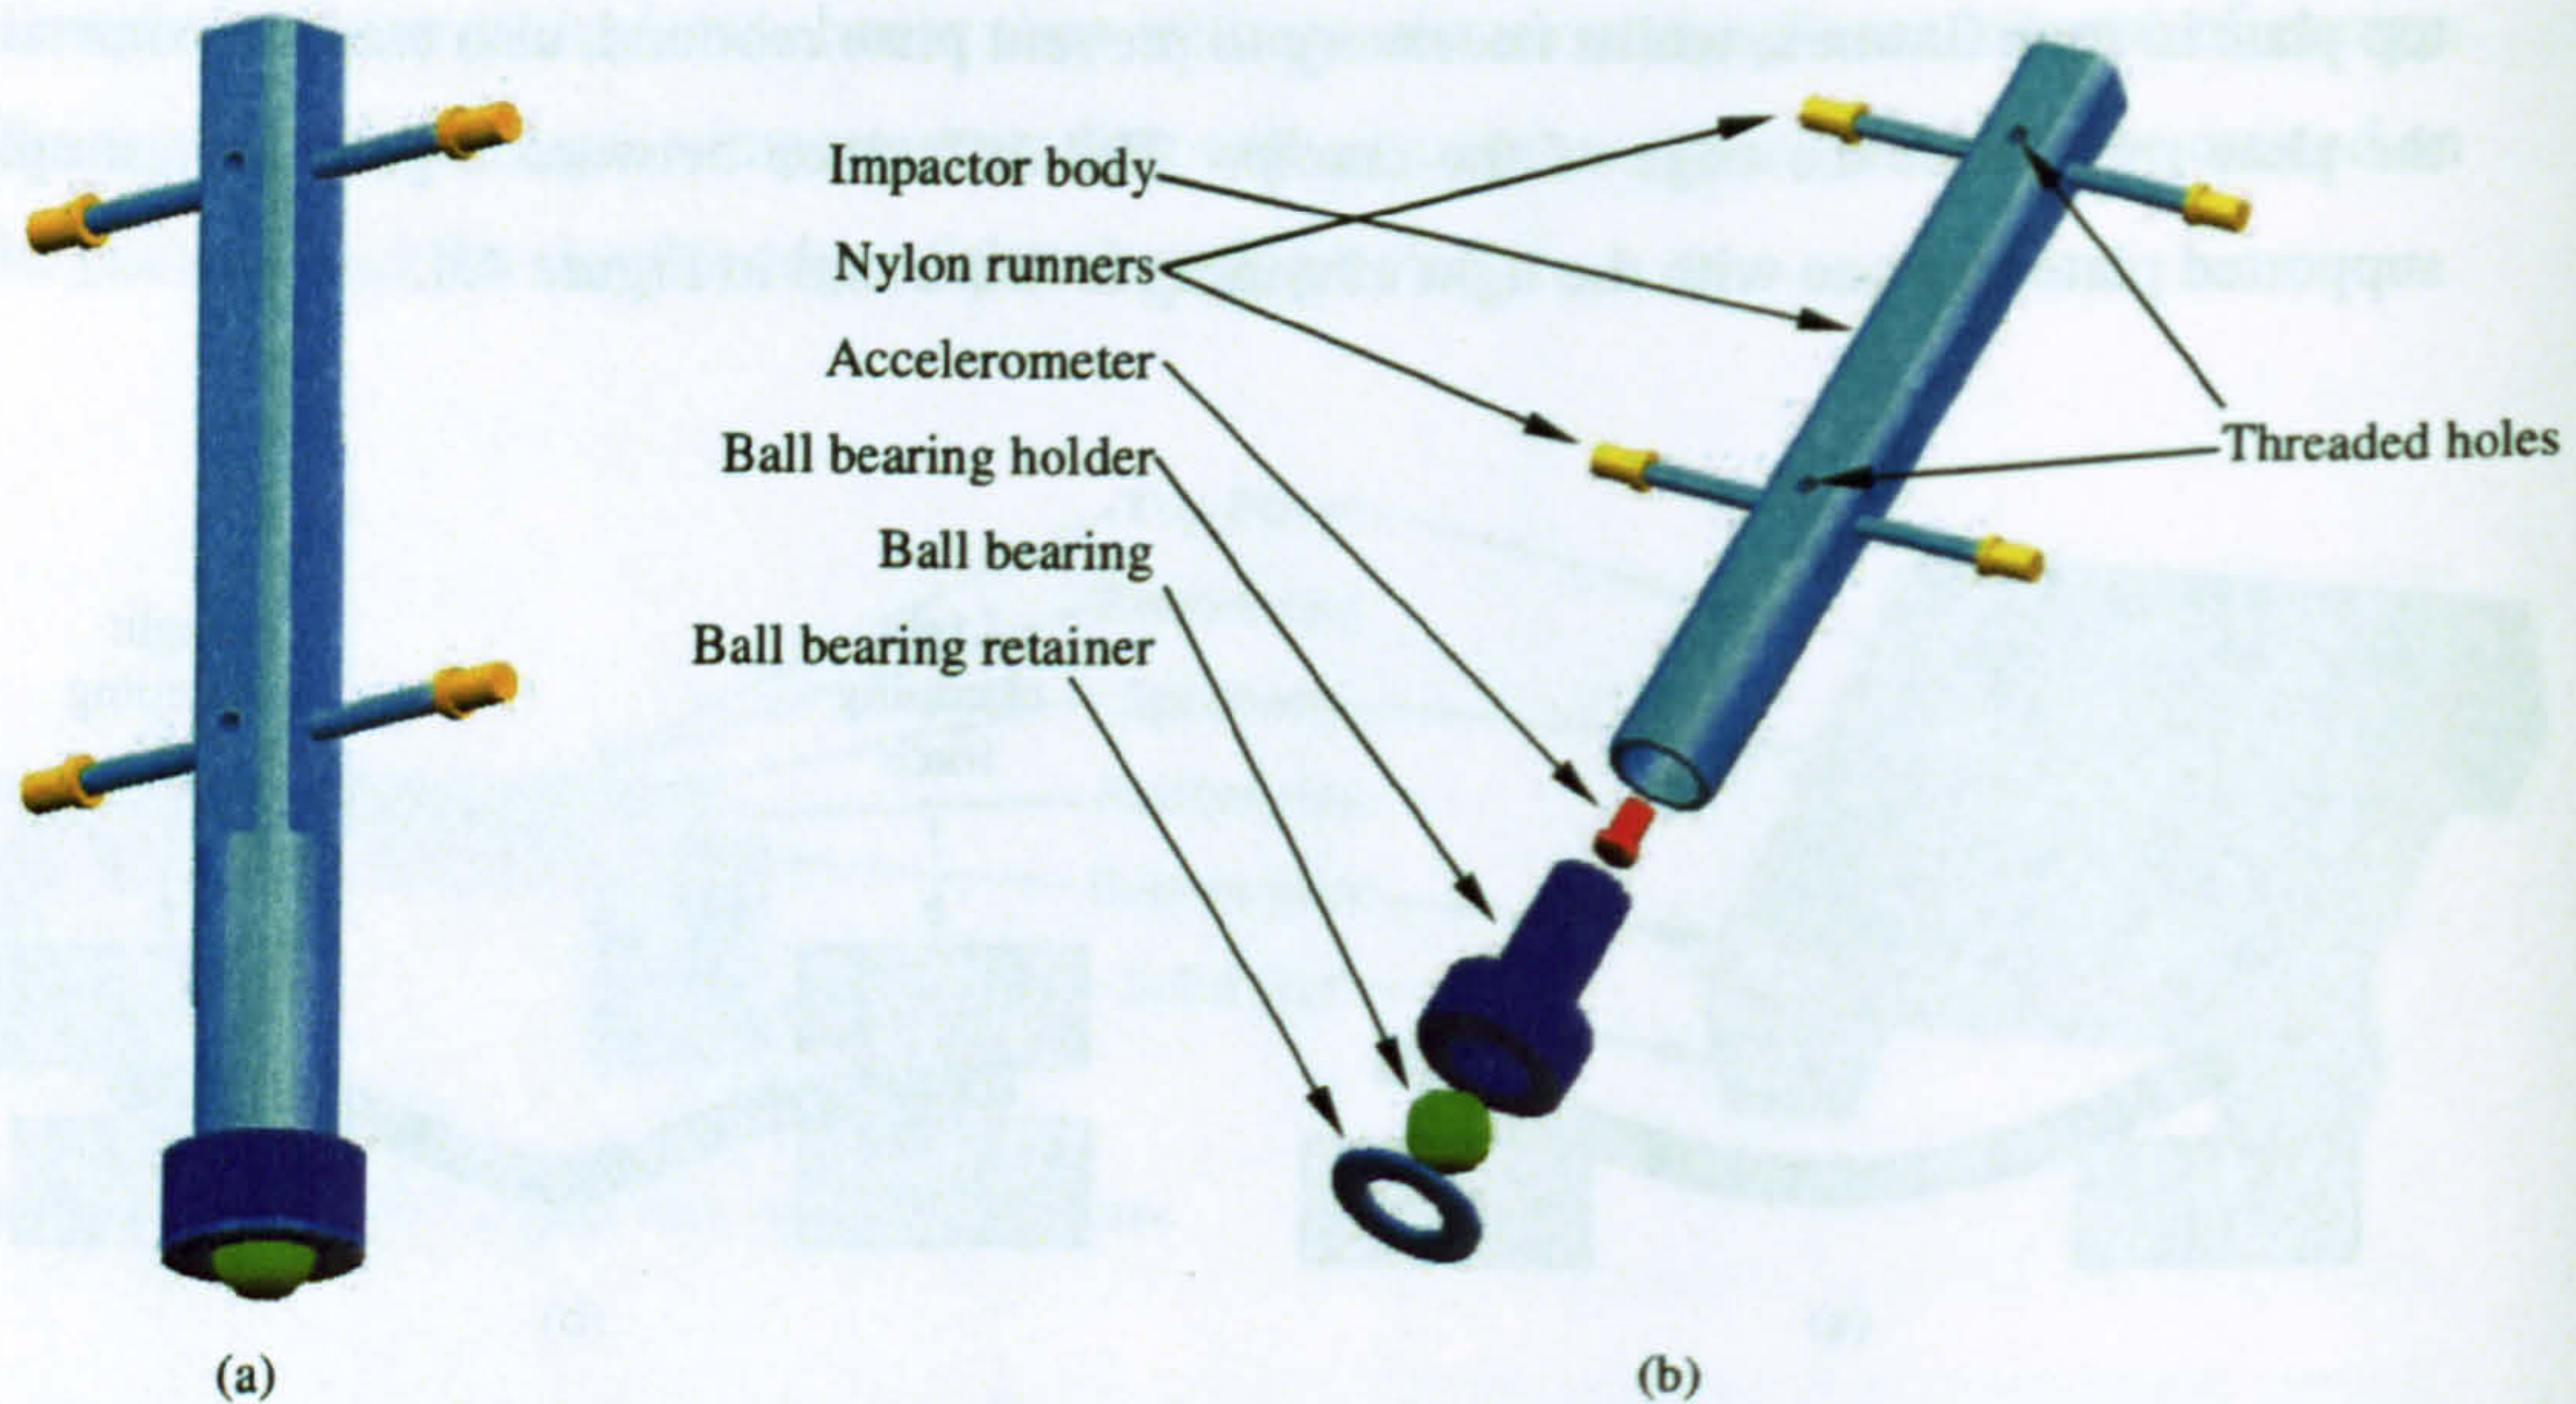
Impactor (a) assembly and (b) exploded view
